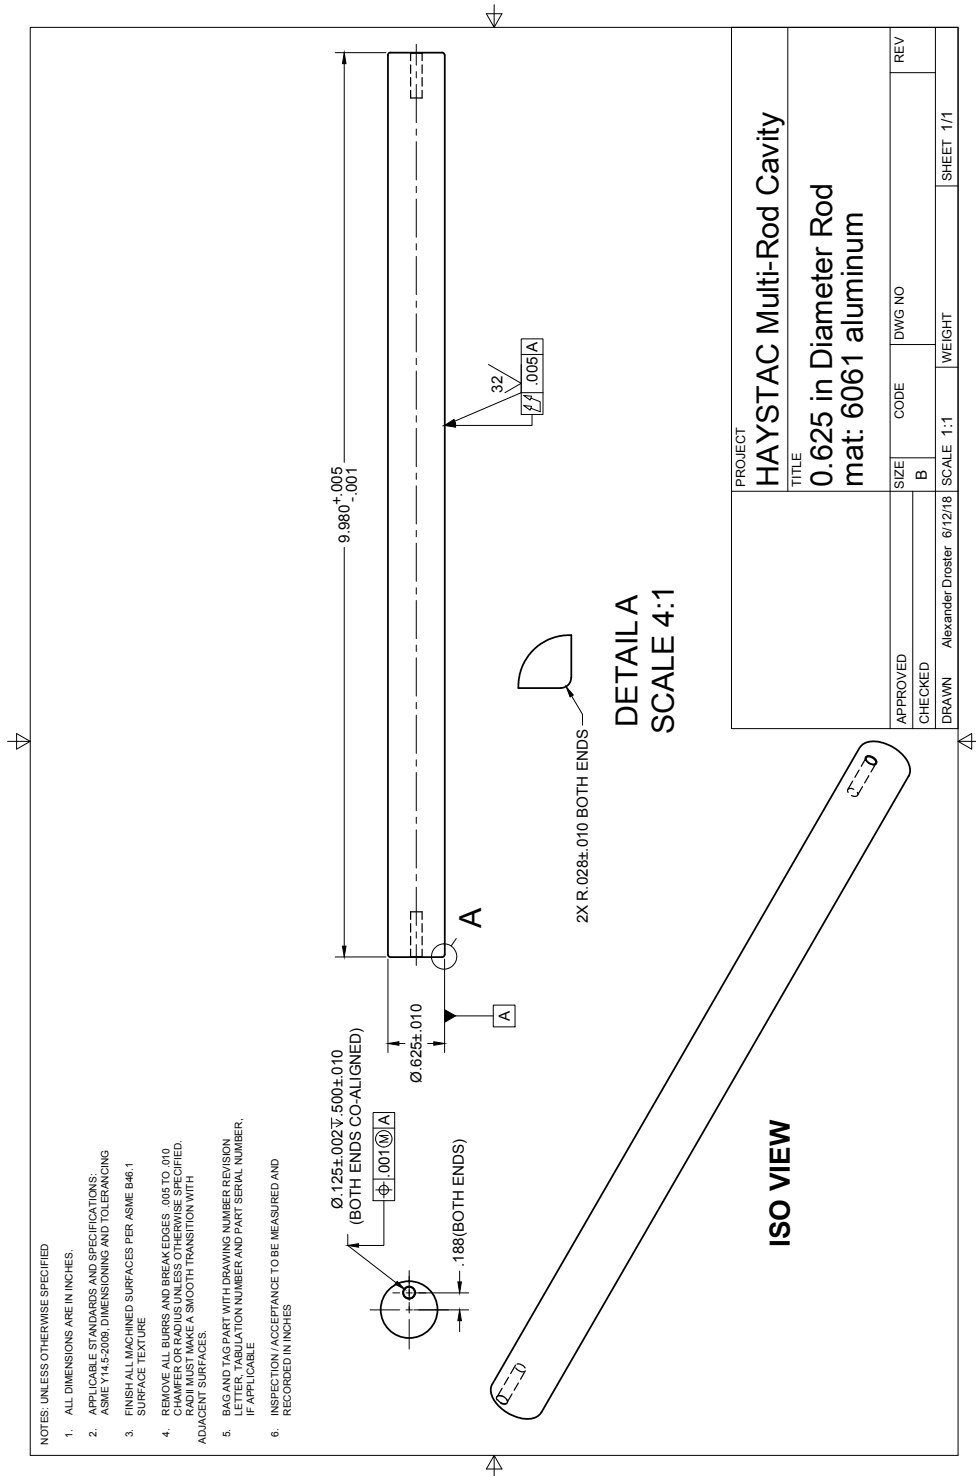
CAD drawing of one of the six rods in the seven-rod cavity.
